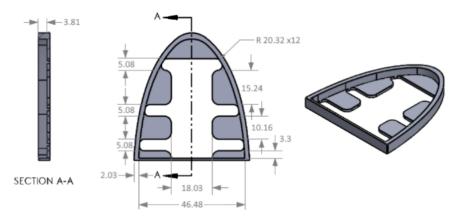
Casing Design. Reproduced as if from [43]. *The casing design was used to prevent lateral expansion of the pneumatic tongue.
